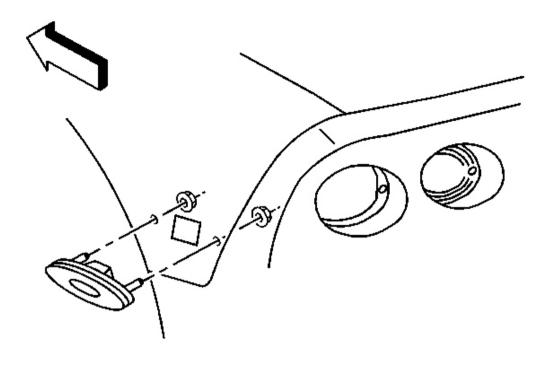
Sidemarker Lamp Socket To Sidemarker Lamp Courtesy of GENERAL MOTORS CORP.
